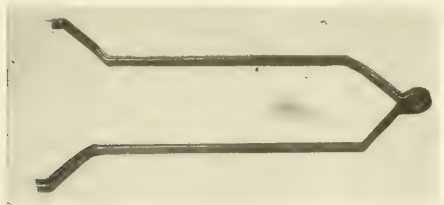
TYPICAL ROTOR COIL, FORMED TO EXACT SHAPE AND COMPLETELY INSULATED BEFORE ASSEMBLY
